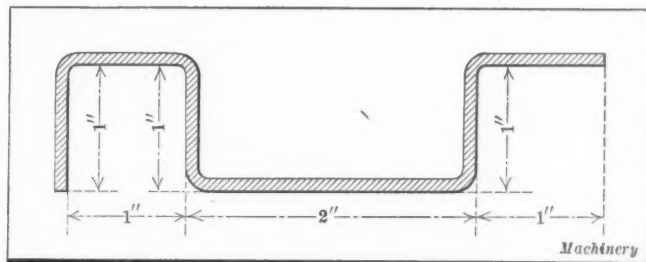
Cross-section of Sheet Metal Bend dimensioned according to New Method
